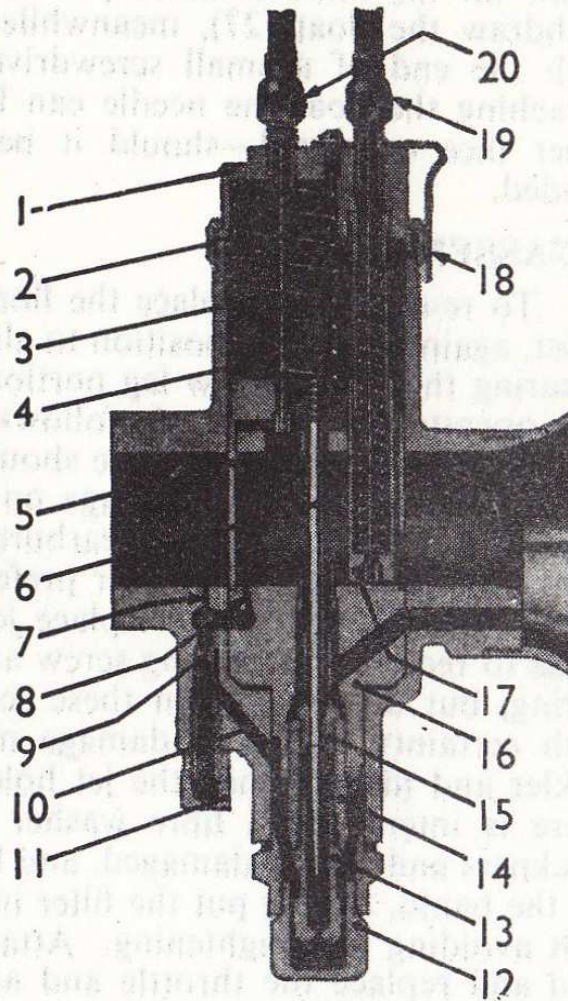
Section through Mixing Chamber, showing Air Valve and Throttle Closed.
